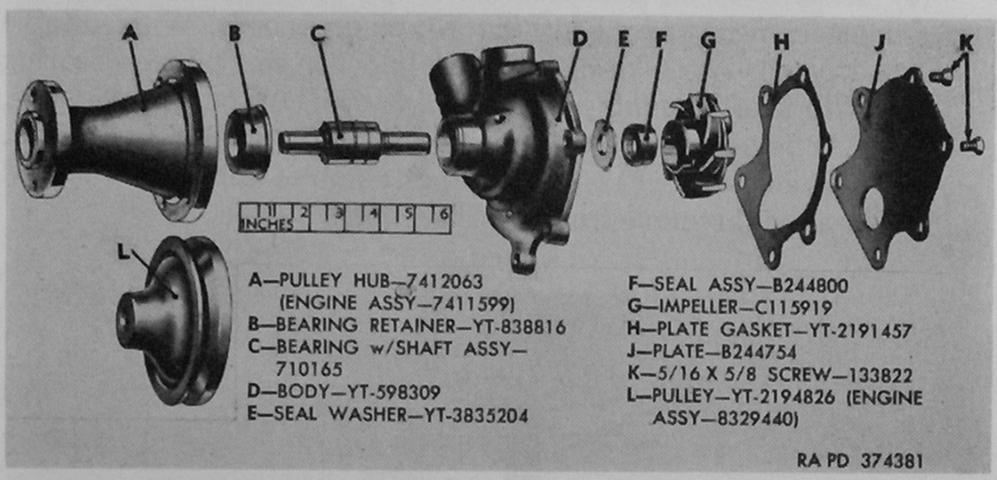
Water pump components—engine assemblies 7411599 and 8329440.
